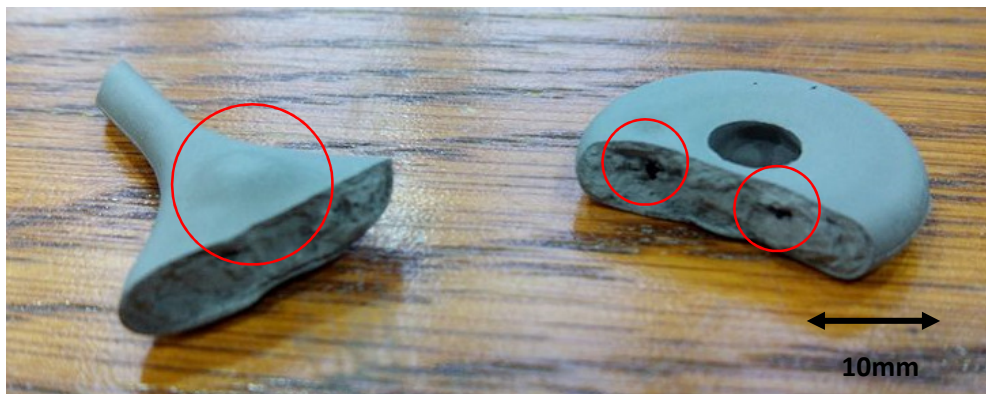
Defects caused to PEG 1500 parts during debinding at 60°C
